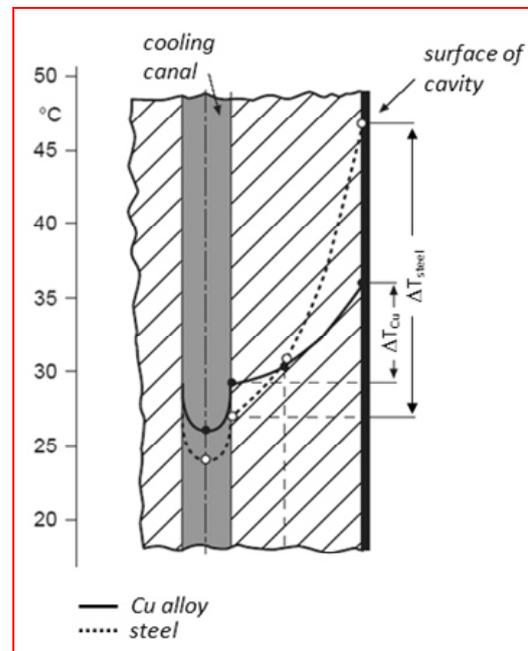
Temperature outline in cross-section of mould during injection part cooling
